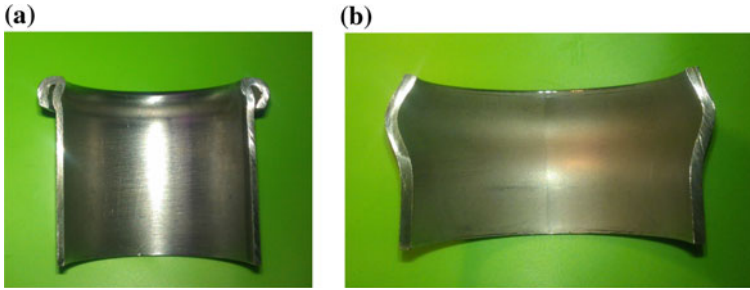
Typical cases of tube work piece stability loss during axial rotary forging: folding outside (a) and inside (b) of the tube blank
